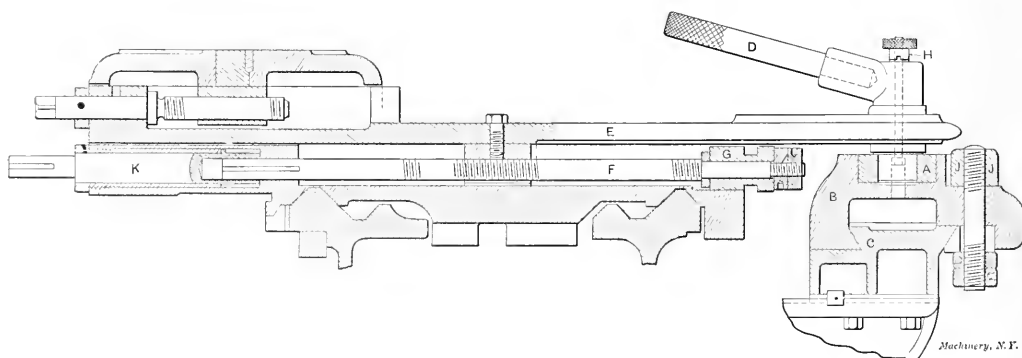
Section of Pulley Crowning Attachment used with American Tool Works Co.'s Lathe.
